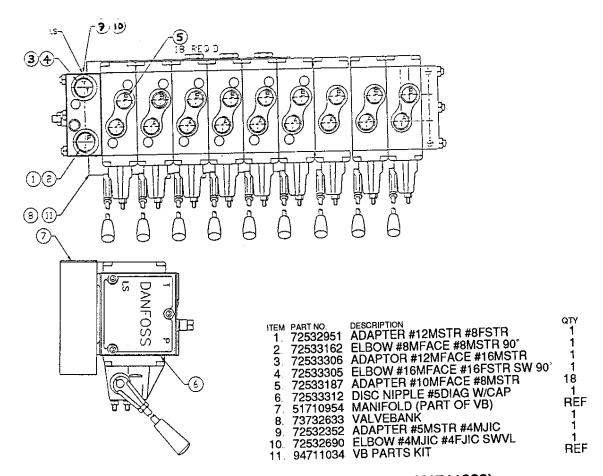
VALVEBANK ASSEMBLY 9-SECTION (51711002)
